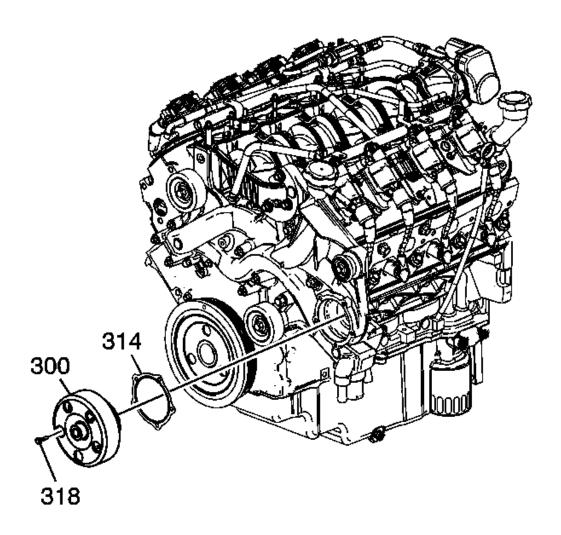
Water Pump, Bolts & Gasket Courtesy of GENERAL MOTORS CORP.
